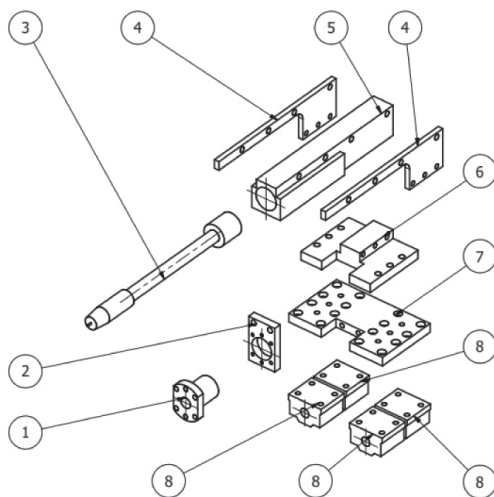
List of elements included in the welding torch of the AS-03 Welding Station.
